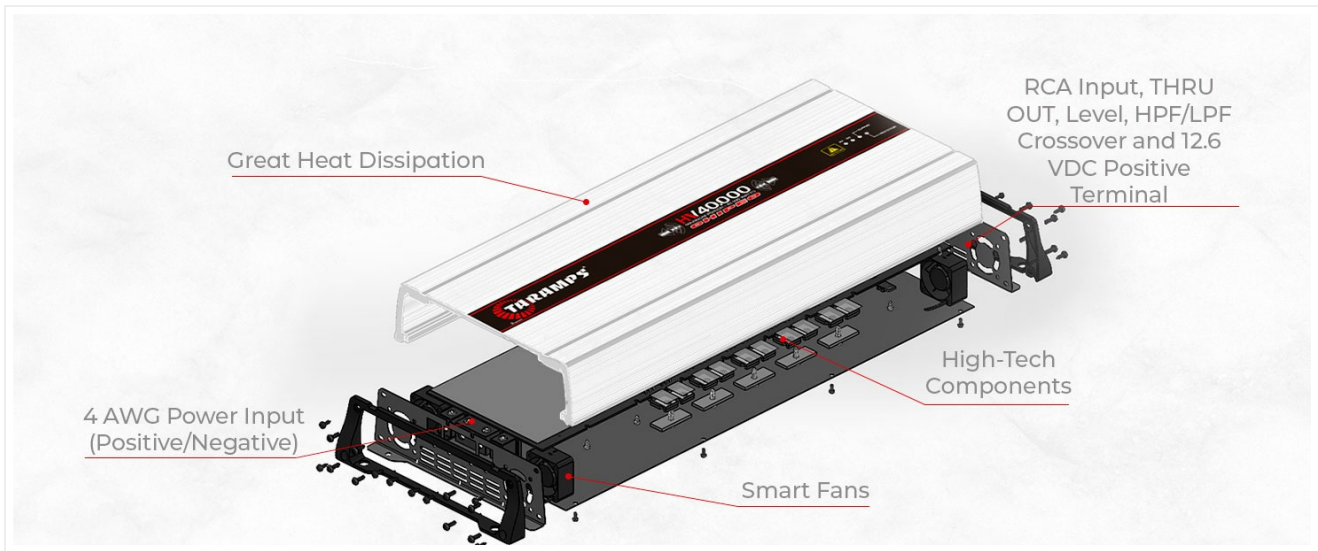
Exploded view illustrating the internal components, including the smart fans and heat dissipation design.
